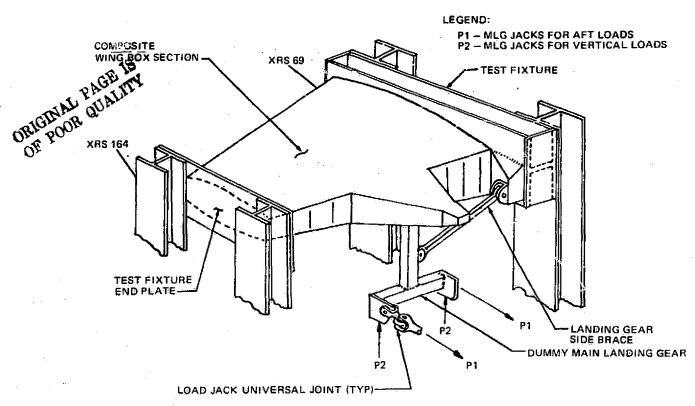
LANDING GEAR CRASHWORTHINESS TEST SETUP
